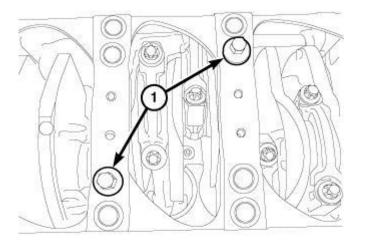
Bed Plate & Bolts Courtesy of CHRYSLER GROUP, LLC
